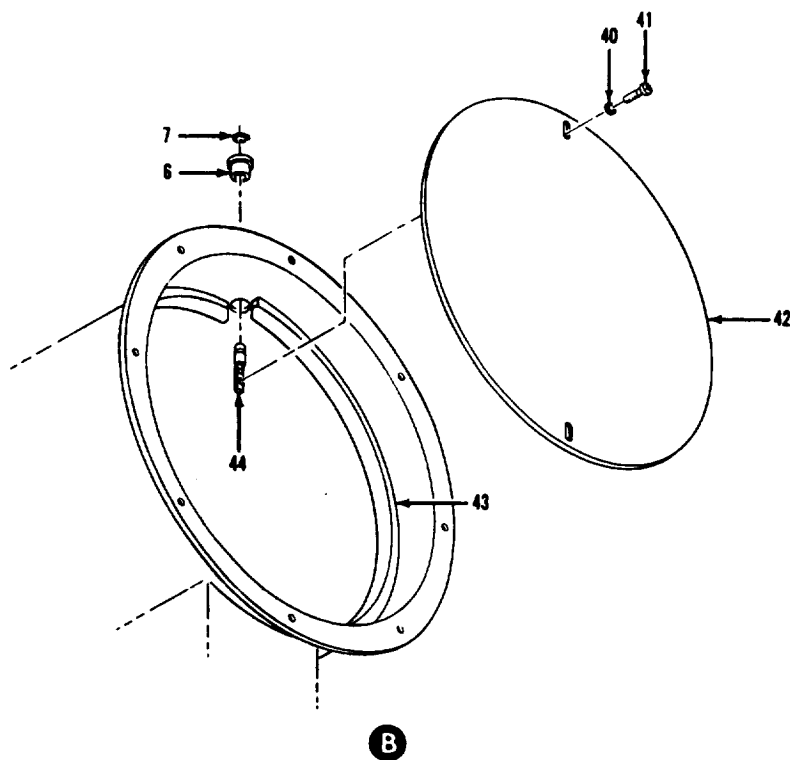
Exhaust Duct Assembly (Sheet 1 of 3)
